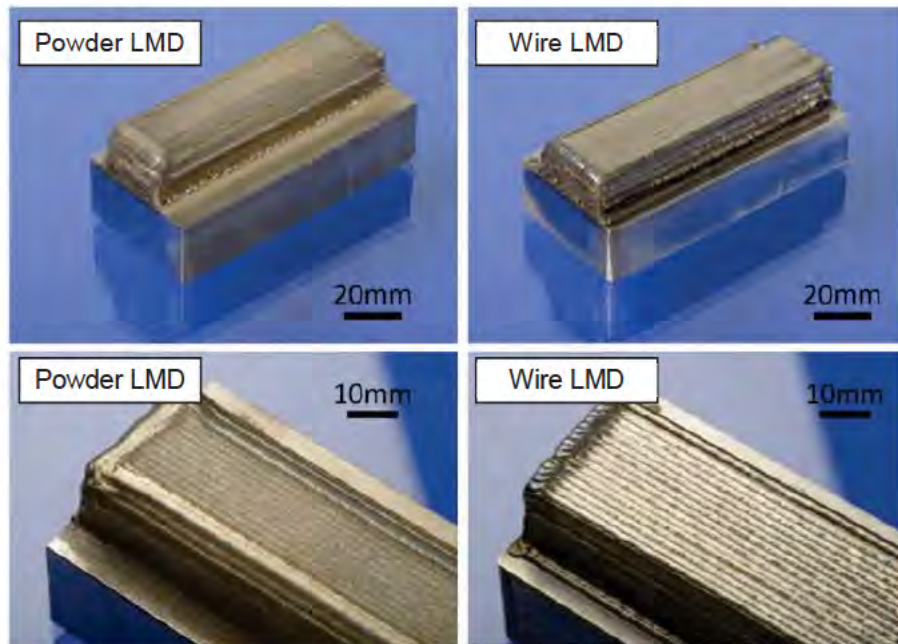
Final shape of powder (left) and wire (right) LMD manufactured parts.
